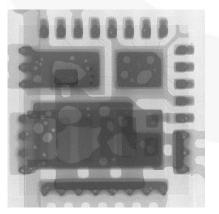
X-ray Showing Large Voids due to Insufficient Solder Paste Printed
